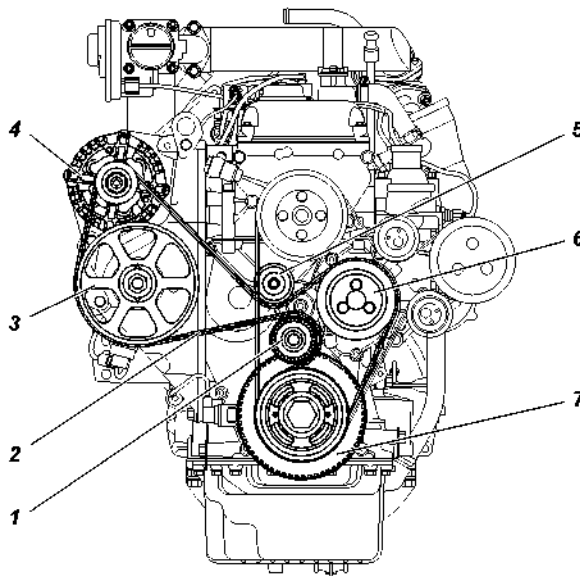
Belt of generator drive, coolant pump and HPFP:
